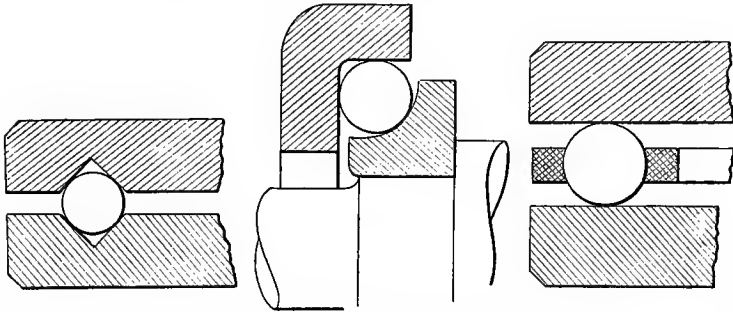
Four point contact ball bearing. FIG. 59.—Three point contact ball bearing. FIG. 60.—Two point contact ball bearing.
